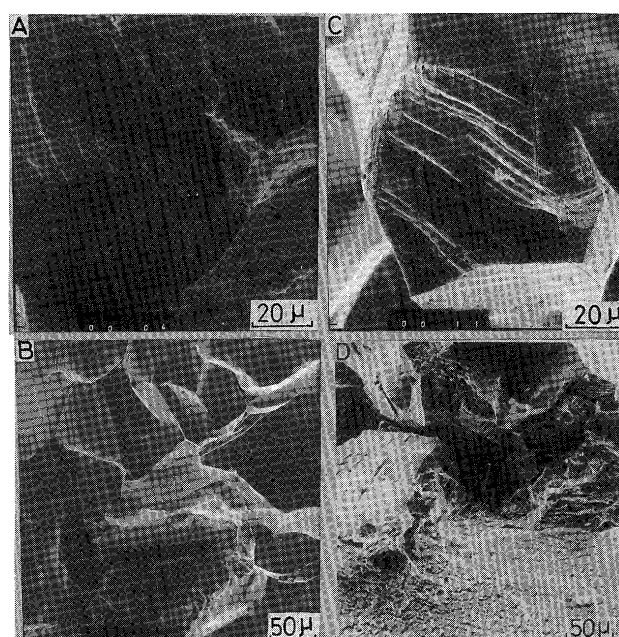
Fractographic photographs of fractured surfaces of specimens.
